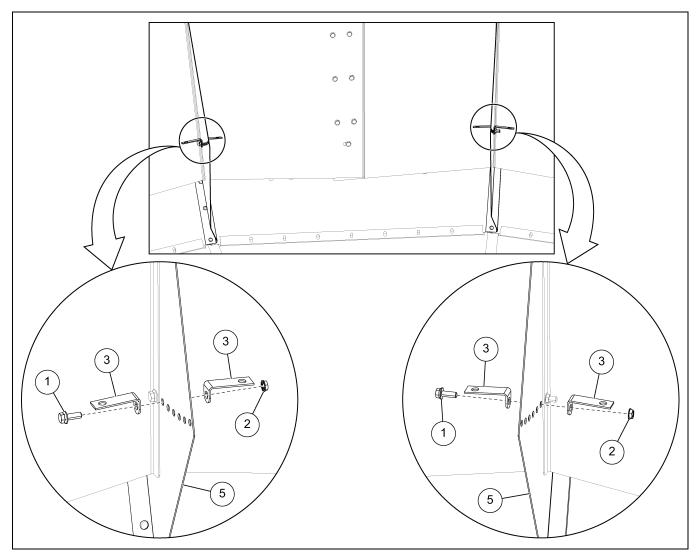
Installing the Brake Brace Clips to the Hopper Channel
